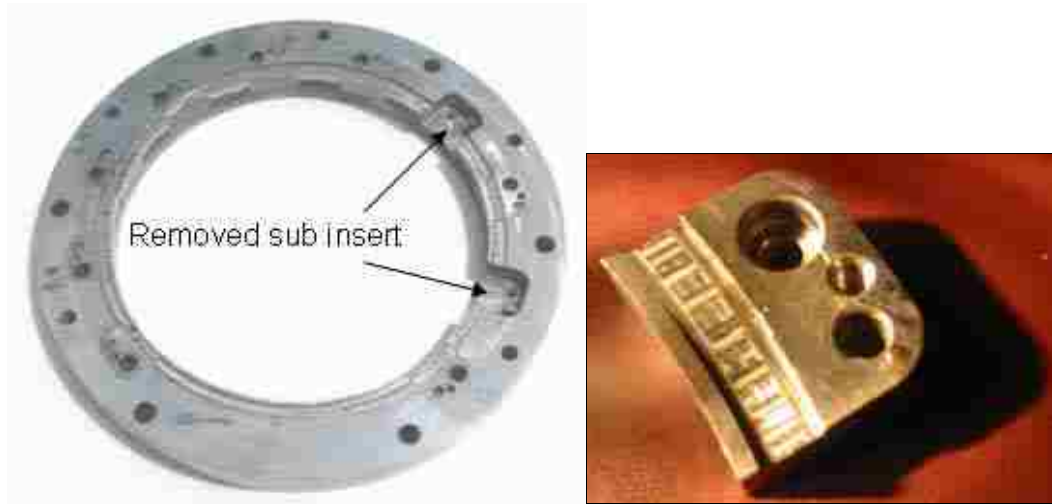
Left: Removable ring for Mahle injection mould for hemispherical parts. Right: Sub insert from removable ring insert for injection mould
